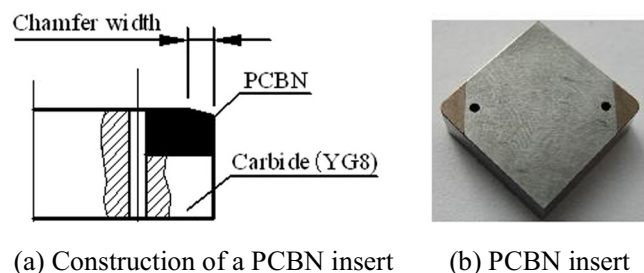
Design schematic of a composite PCBN insert. a Construction of a PCBN insert. b PCBN insert
